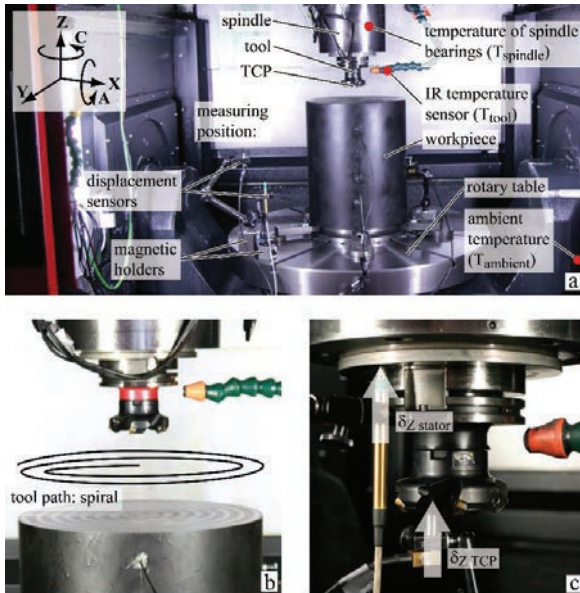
Experimental setup on 5-axis milling machine; overview (a), cutting process (b), measuring position (c).
